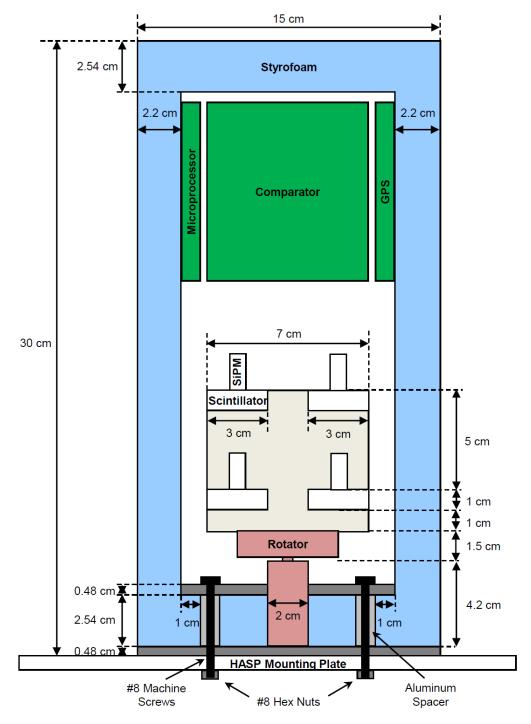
Payload as viewed from the front. The top and bottom aluminum plates, as well as the aluminum spacers, are clearly visible. Four machine screws protrude from the bottom of the HASP plate, and are secured in place with hex nuts. The rotator is attached similarly, but the screws are not shown to make the drawing less cluttered. Electronics boards will be attached to the sides of the frame, near the top to avoid interfering with the rotation of the detector array.
